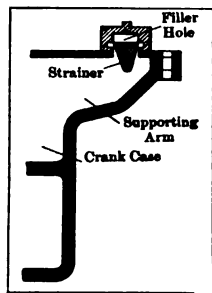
Position of filler hole when placed in the crankcase supporting arm
